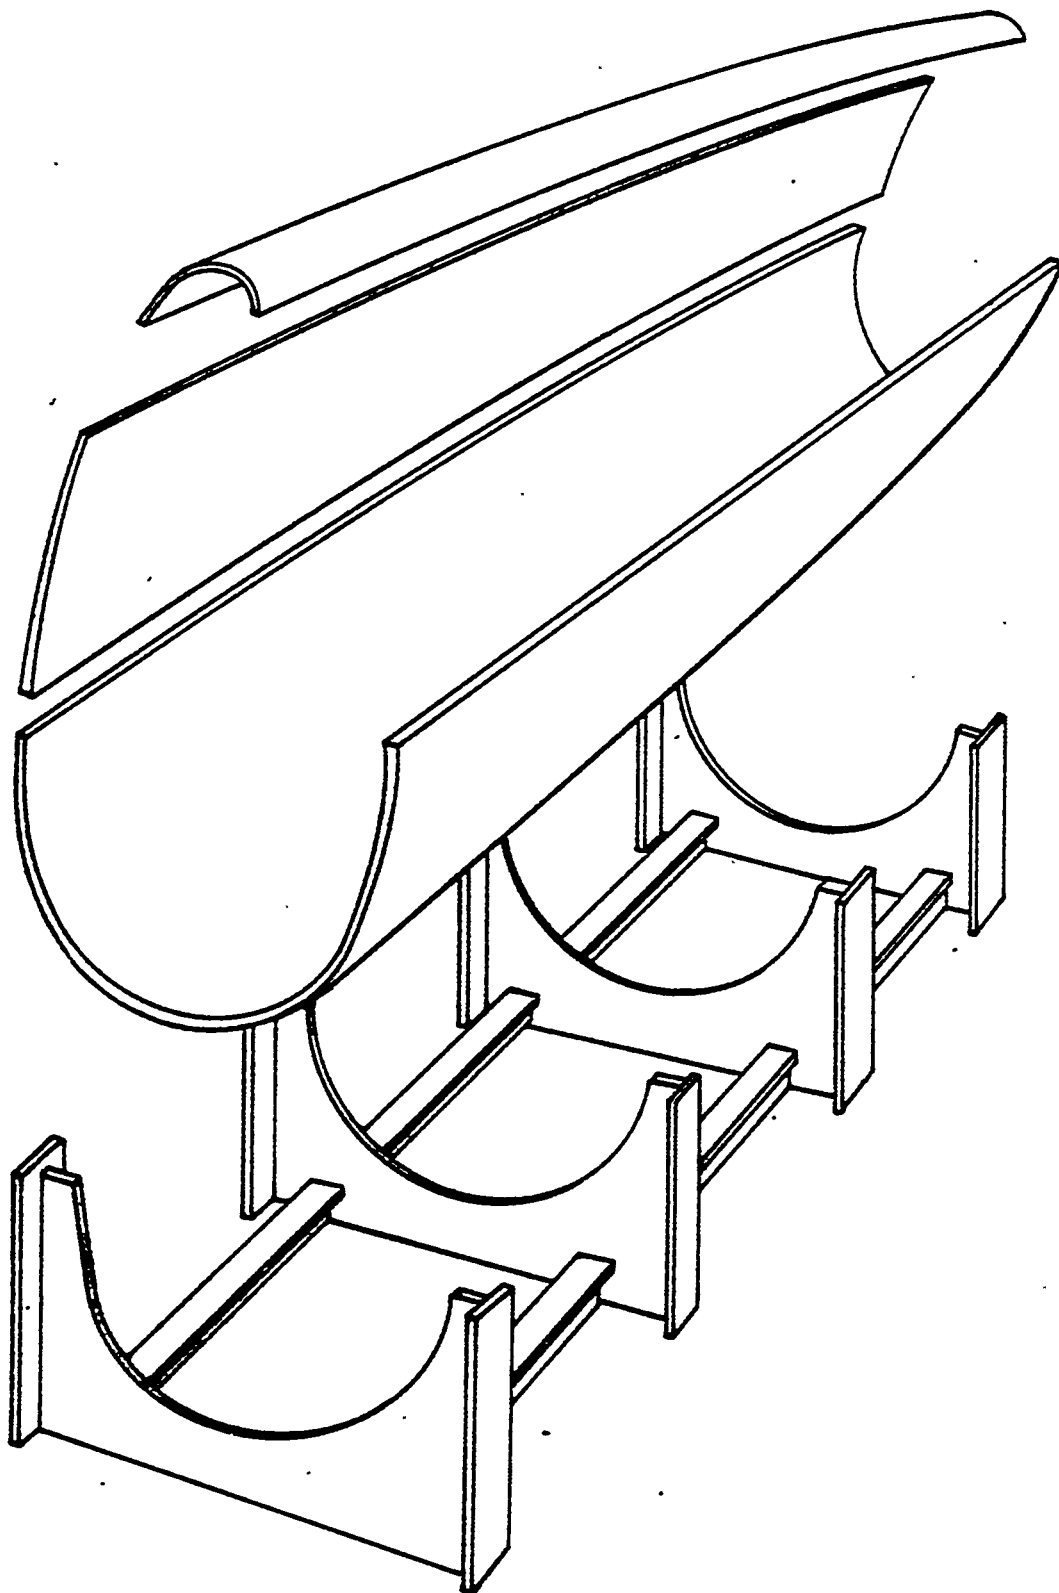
Stack Assembly and Weld Fixture
